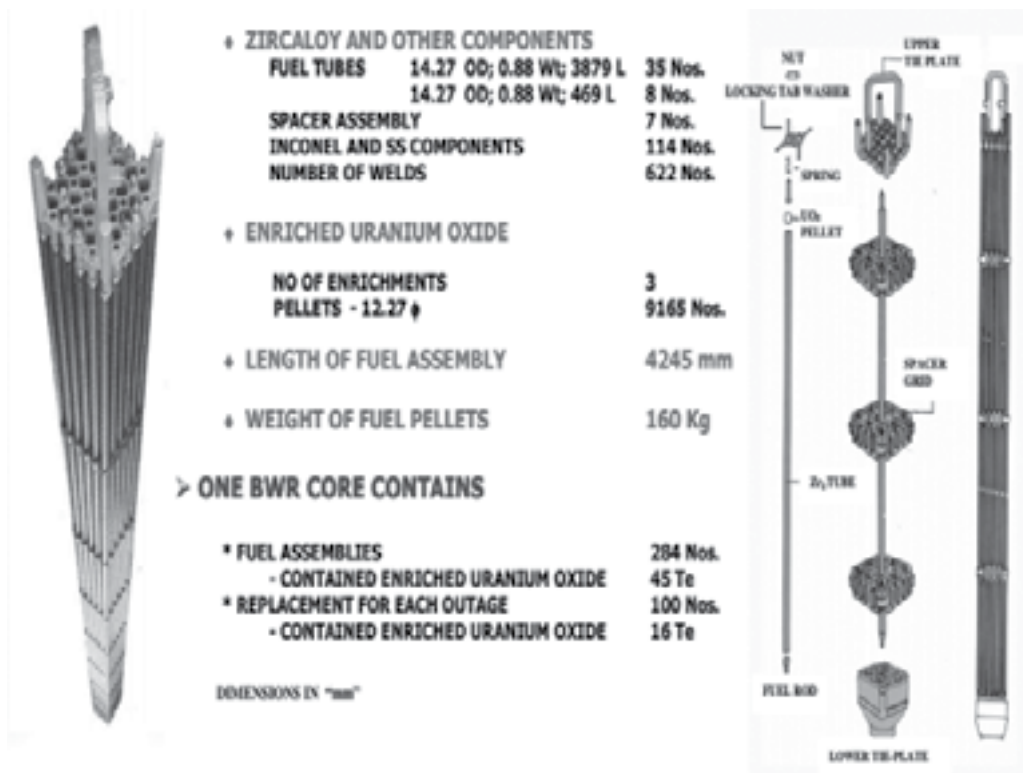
A Typical 6 X 6 BWR 160 Mwe Fuel Assembly Manufactured At NFC For Taps 1 & 2
